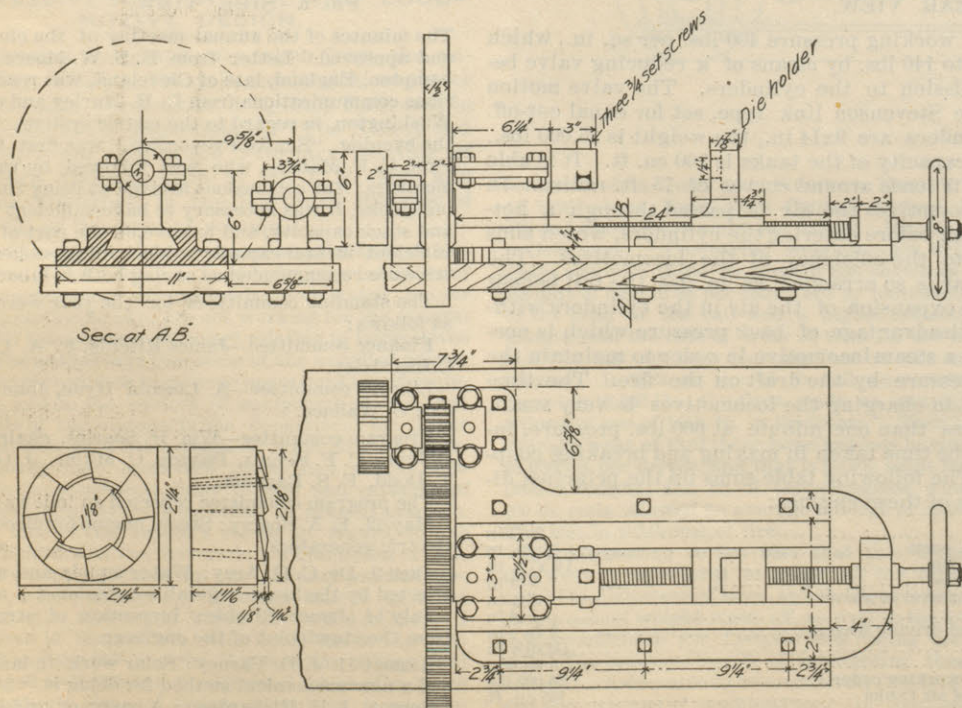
CROWN BAR BOLT FOR FACING MACHINE.
